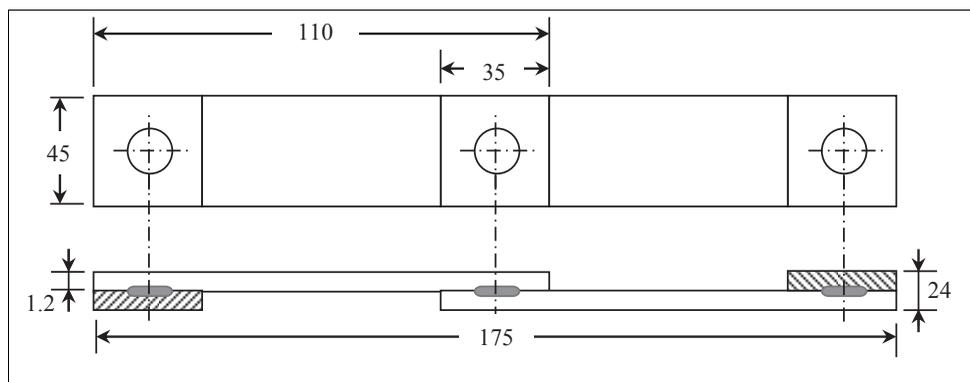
The spot welded sample (Ghazali, Manurung, Mohamed, & Abdullah, 2015)
